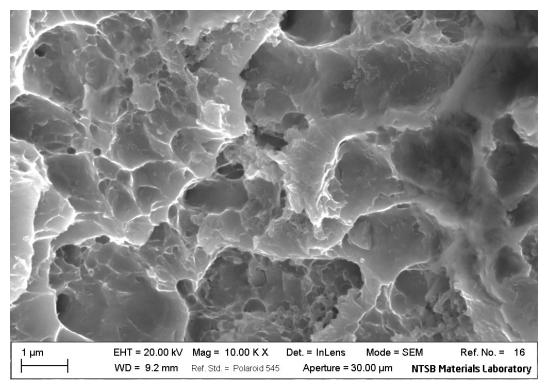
Secondary electron (SE) micrograph of the fracture surface of the bolt from the actuator piston, showing dimple rupture indicative of overstress.
